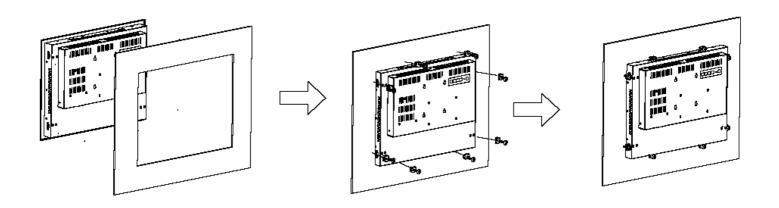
Figure A: Panelmounting of the ADP1120/1150/1170/1190
